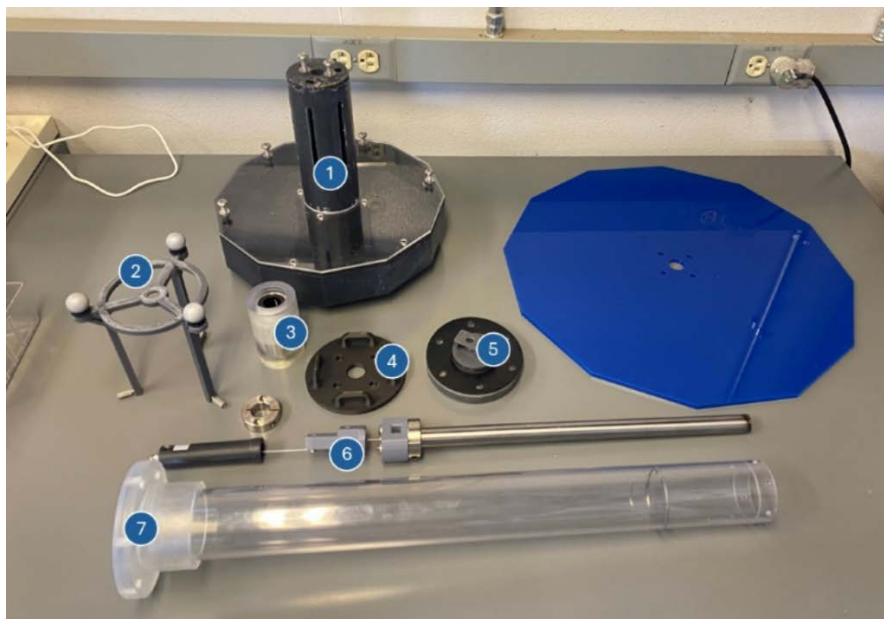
Disassembled RM3 model with 3D-printed components labeled per Table 7
